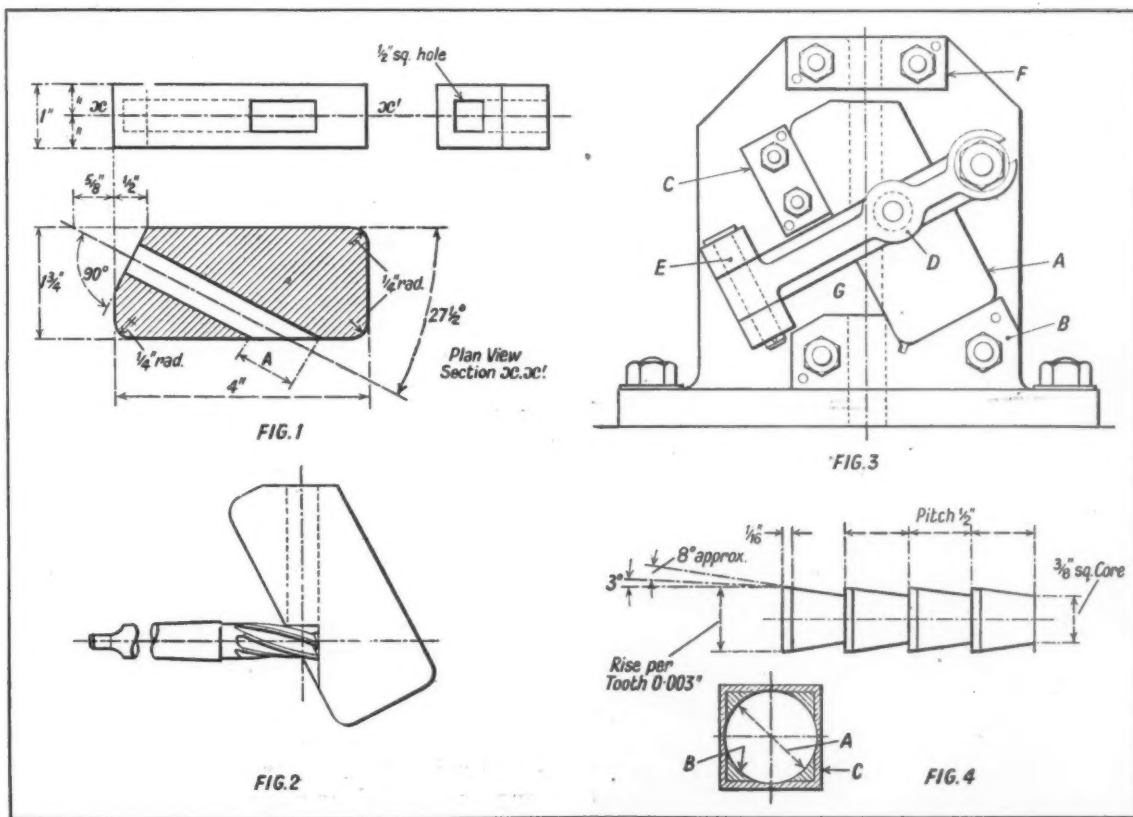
Part in which Square Oblique Hole is Produced by Drilling, End-milling, and Broaching. Fig. 2. Milling Operation Preparatory to Broaching. Fig. 3. Broaching Fixture. Fig. 4. Details of Broach and Diagram Indicating Sequence of Operations
